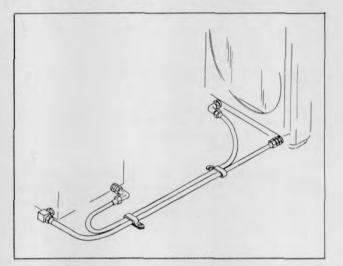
Transmission Oil Cooler Lines C A U T I O N
